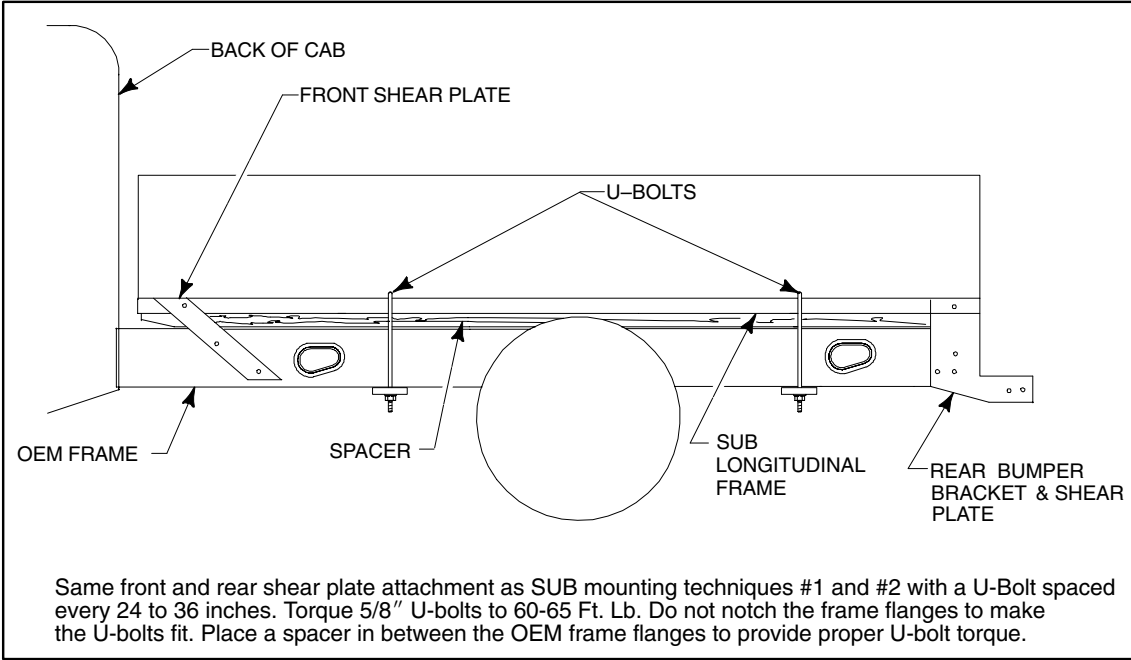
FIGURE E - SUPER DUTY F-SERIES SUB MOUNTING TECHNIQUE #4 FOR 60", 84", AND 120" CA CHASSIS CABS.
